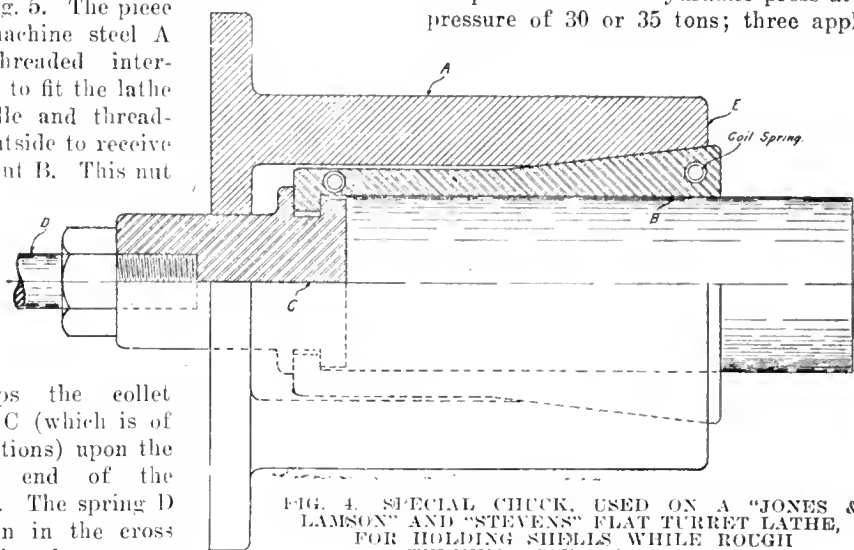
SPECIAL CHUCK, USED ON A "JONES & LAMSON" AND "STEVENS" FLAT TURRET LATHE, FOR HOLDING SHELLS WHILE ROUGH TURNING NOSE AND BORING.
